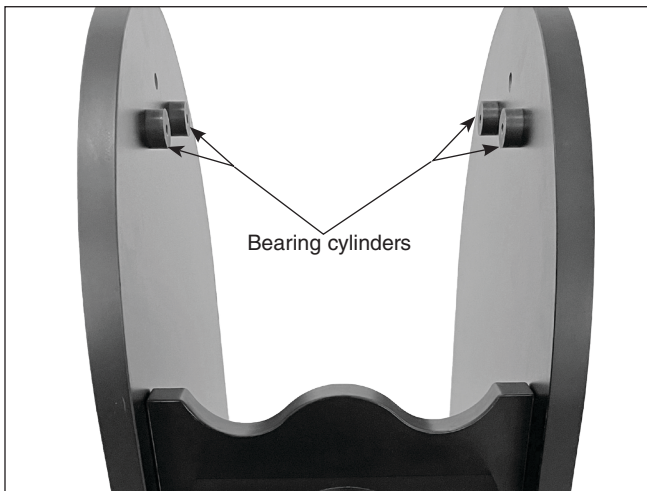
Attach a pair of bearing cylinders to the inside of both of the side panels. Insert the screws from the outside of the panels.
